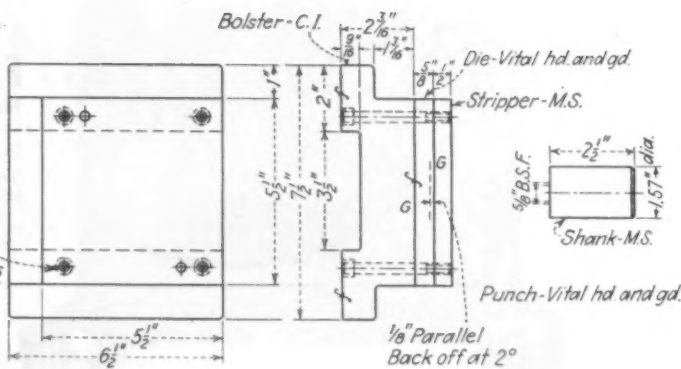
For limited production runs, the blanking dies shown here were developed about two years ago. The die consists of a bolster made of cast iron with a steel die and is mounted with a steel stripper plate.
